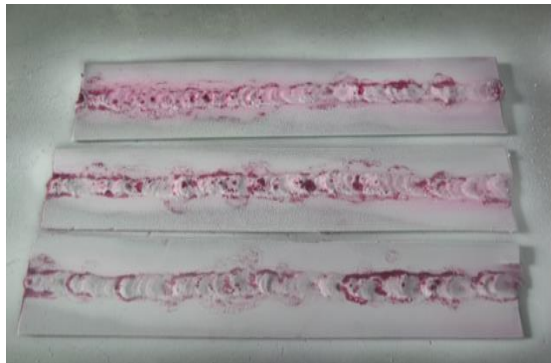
Results of penetrant tests on specimens welded with welding wire made from the parent itself
